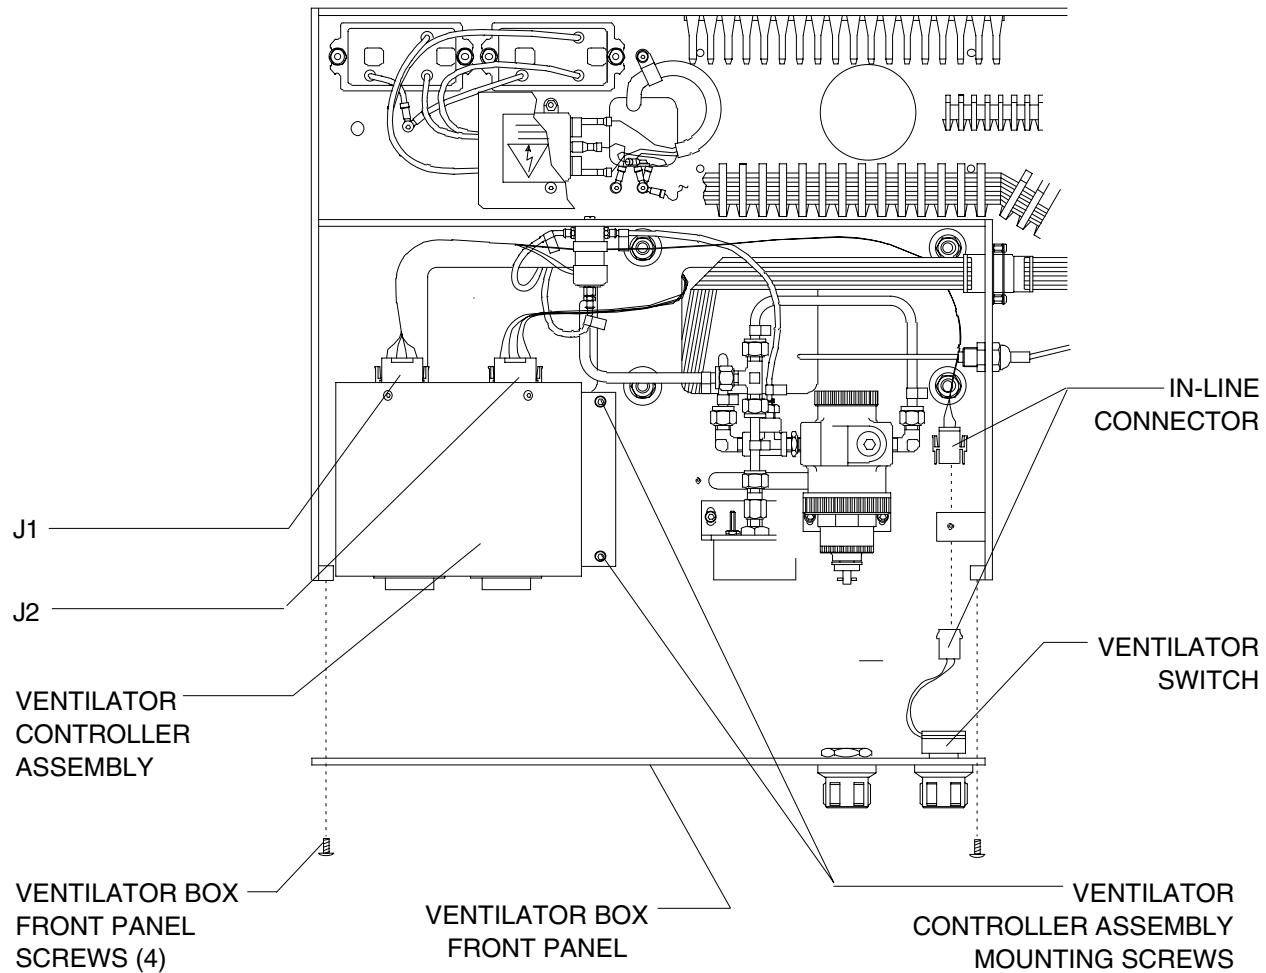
AV-E VENTILATOR CONTROLLER ASSEMBLY
